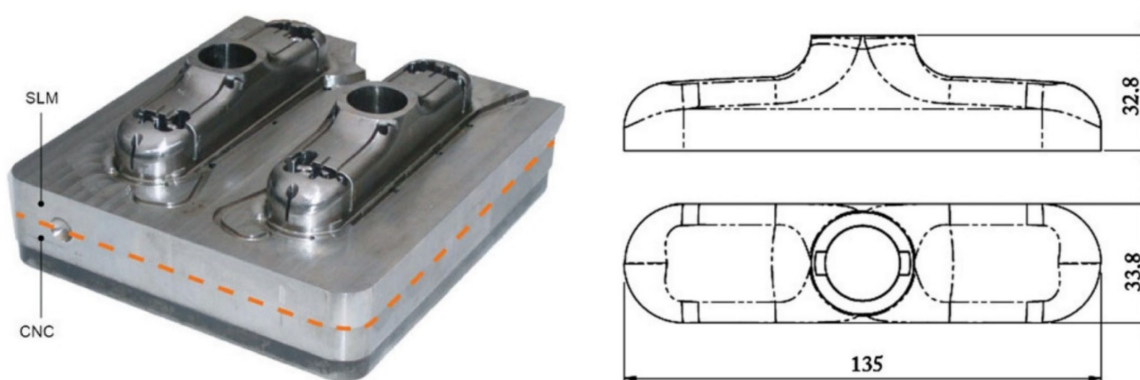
The impression block, a die for zinc alloy castings, was made by applying a hybrid approach. The upper piece was made by selective laser melting (SLM) or L-PBF from powders of AISI H11 (DIN 1.2343). The lower piece was built by CNC machining from a blank made of the same steel [136]. See also Figure 25. All displayed dimensions are in mm.
